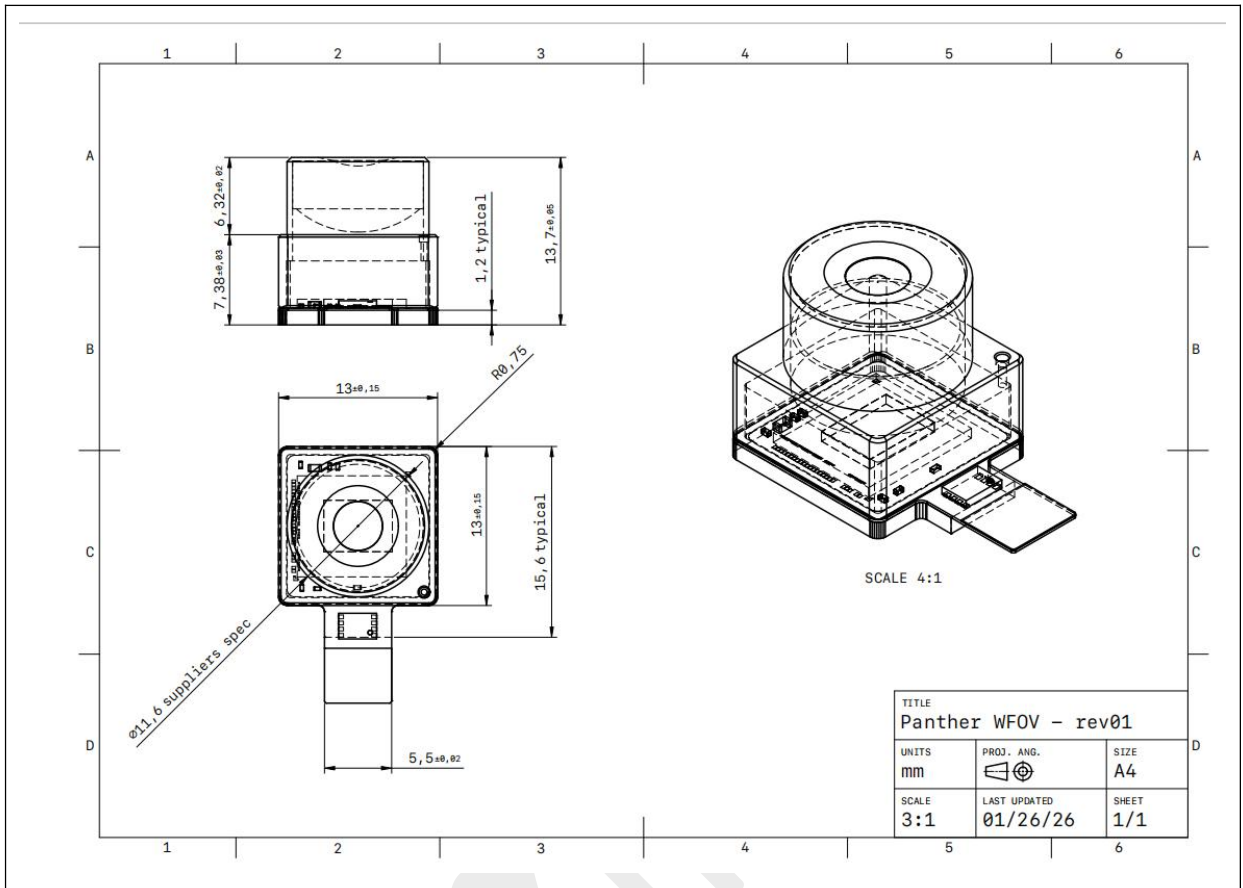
Dimension of MI1602M6C. All dimensions are in mm, unless specified otherwise.
